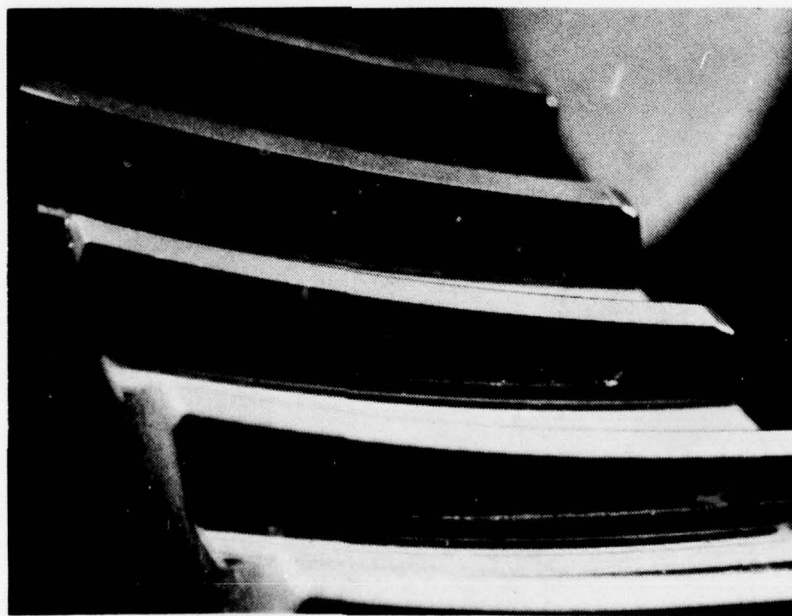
Main input gear teeth (drive side) showing light scoring after 21-minute loss-of-lube retest of transmission number 1.
